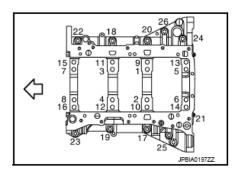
Lower Cylinder Block Bolts Tightening Sequence (No. 17 To 26) Courtesy of NISSAN MOTOR CO., U.S.A.
